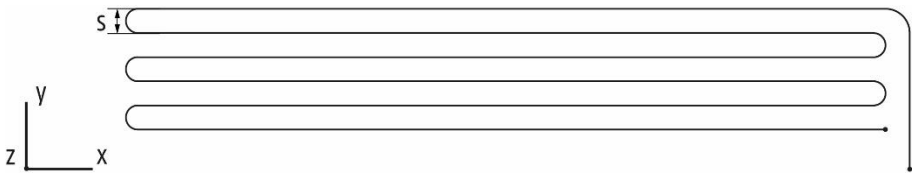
Tool path of a single layer EFAM test specimen, top view.
